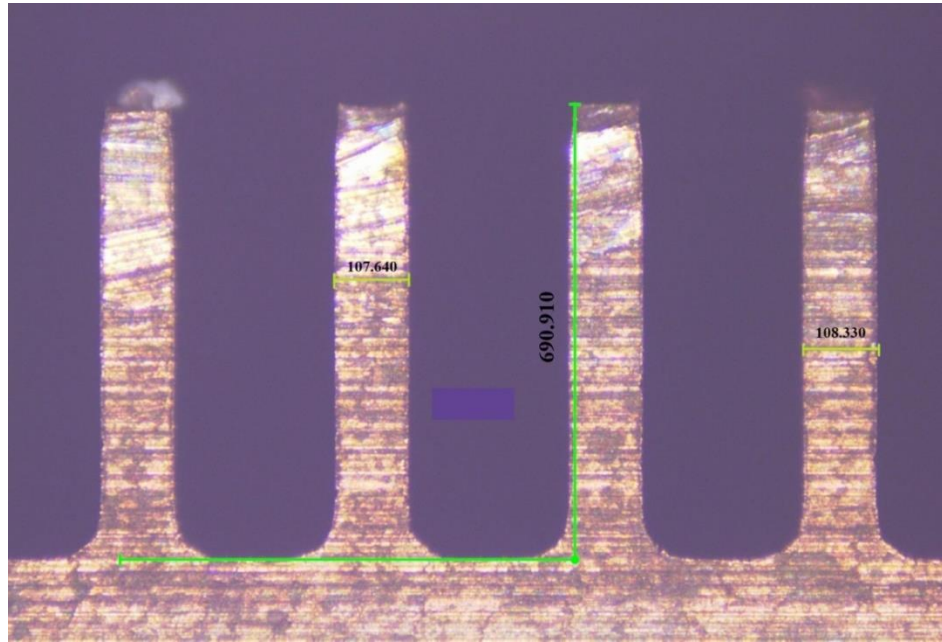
Side view of the fabricated microchannels (dimensions in μm) [4]
